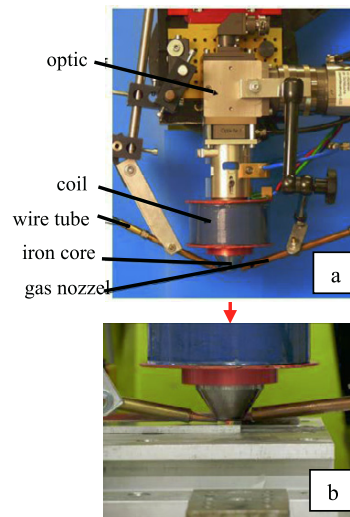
Welding head combining laser optic and the Magnetic coil arrangement
